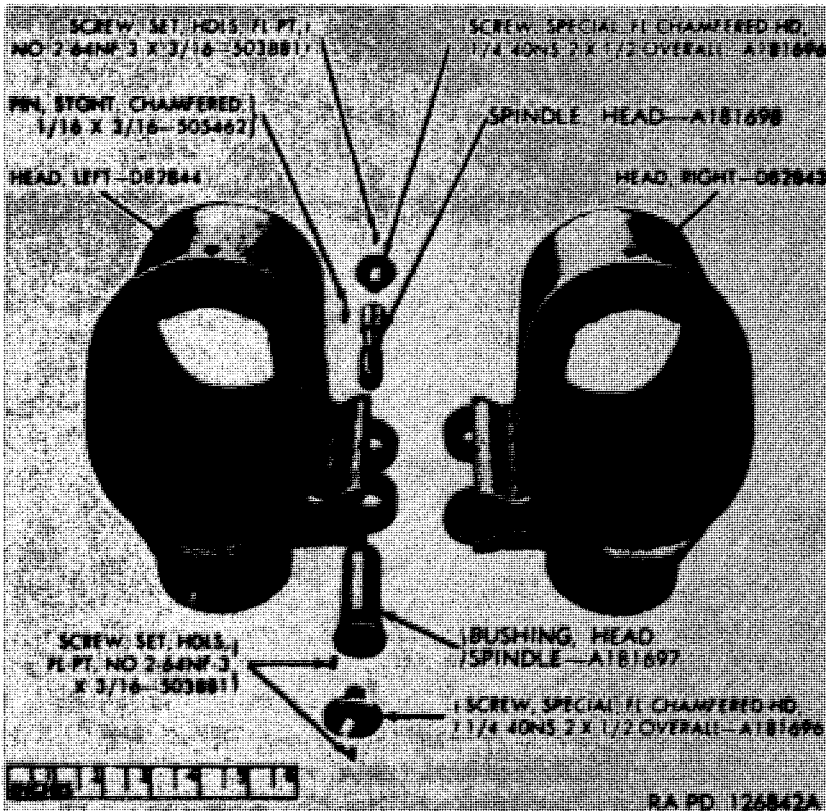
Left and right stripped head assembly C82515 - exploded view.
